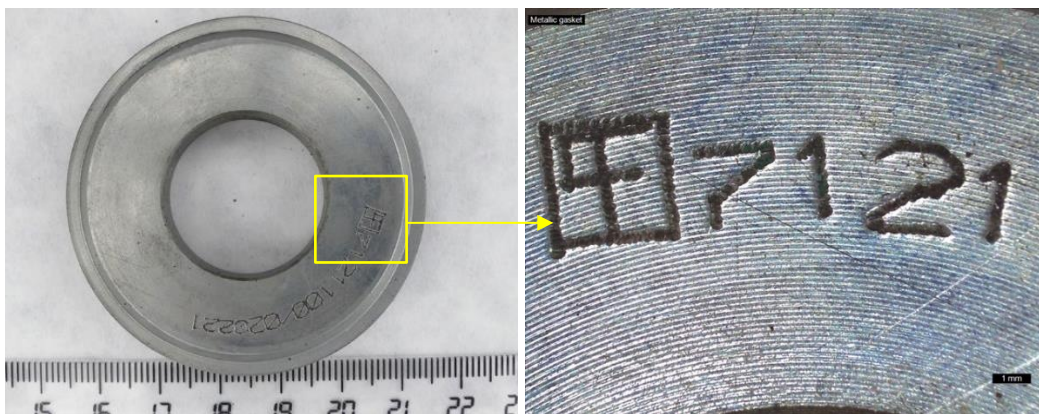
Parts of the pressure regulator: metallic gasket general appearance (left) and detail (right)
